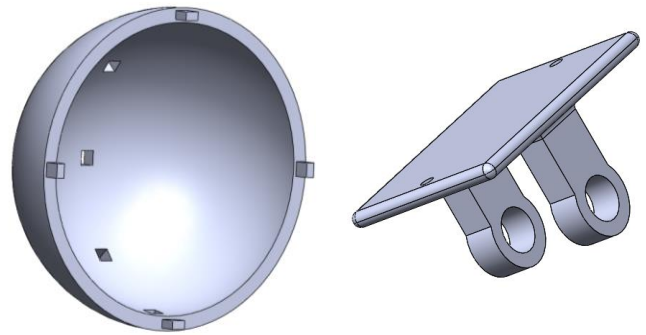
CAD Models of the hemispherical enclosure prototype (left) and the electronics mounting platform, manufactured on the CEID 3D printers.
